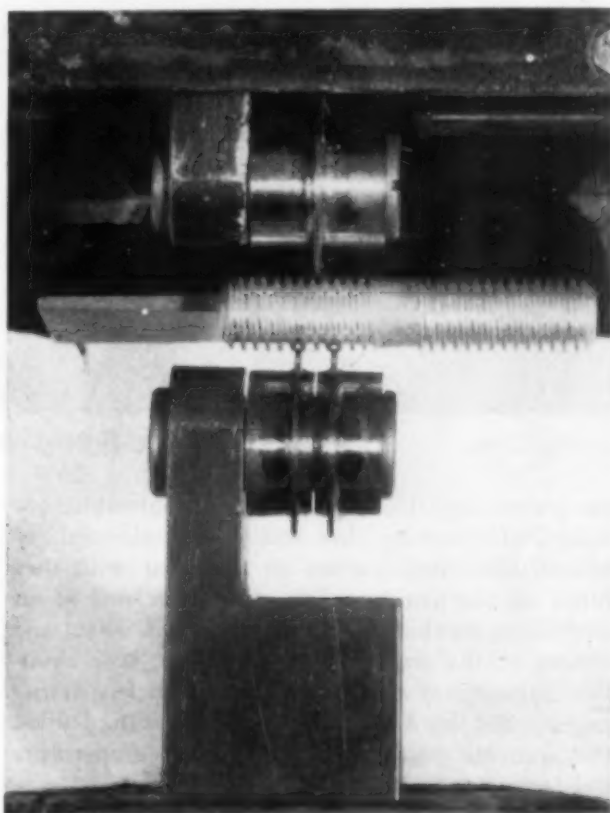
Divided Lower Roll on Gage for Checking Pitch Diameter of Threads
